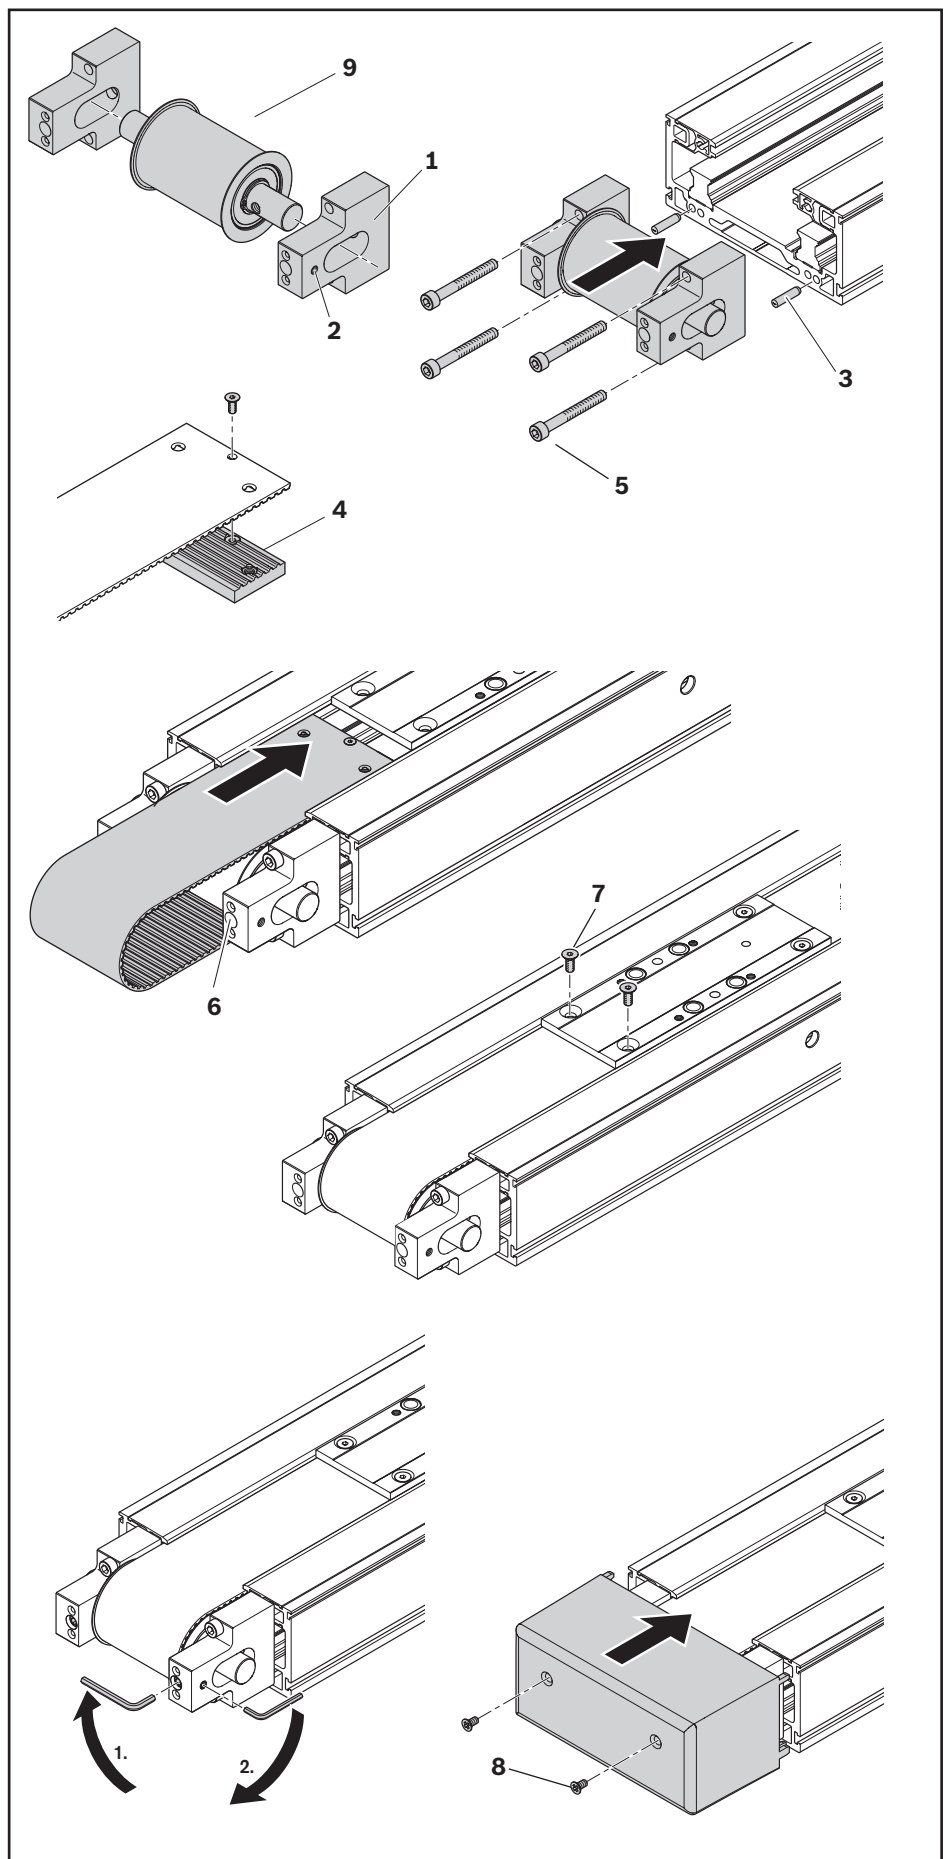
Replacing the idler end enclosure CKR -090, -110, -145, -200, -280
